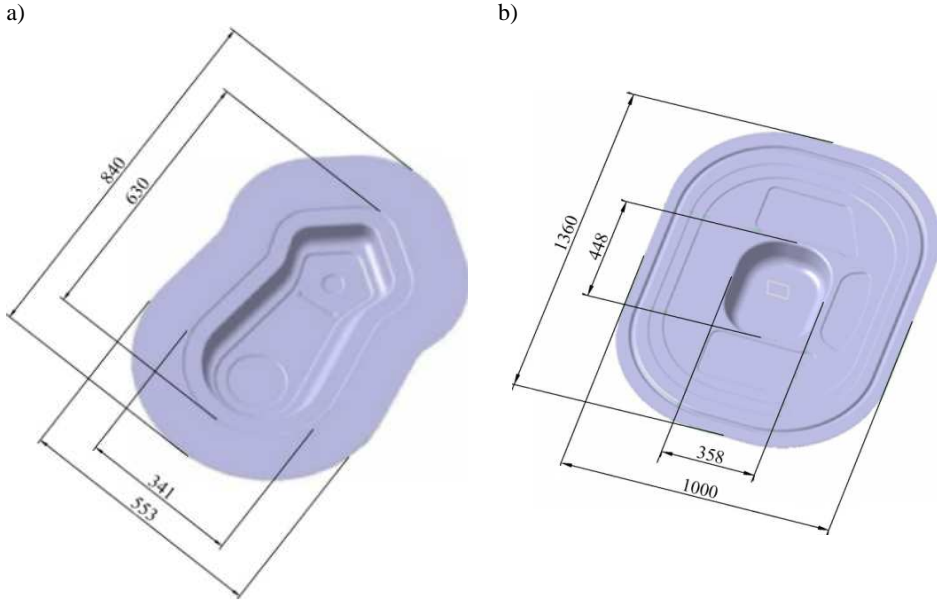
Variants of drawpiece A (a) and B (b) with defined basic dimensions in mm
